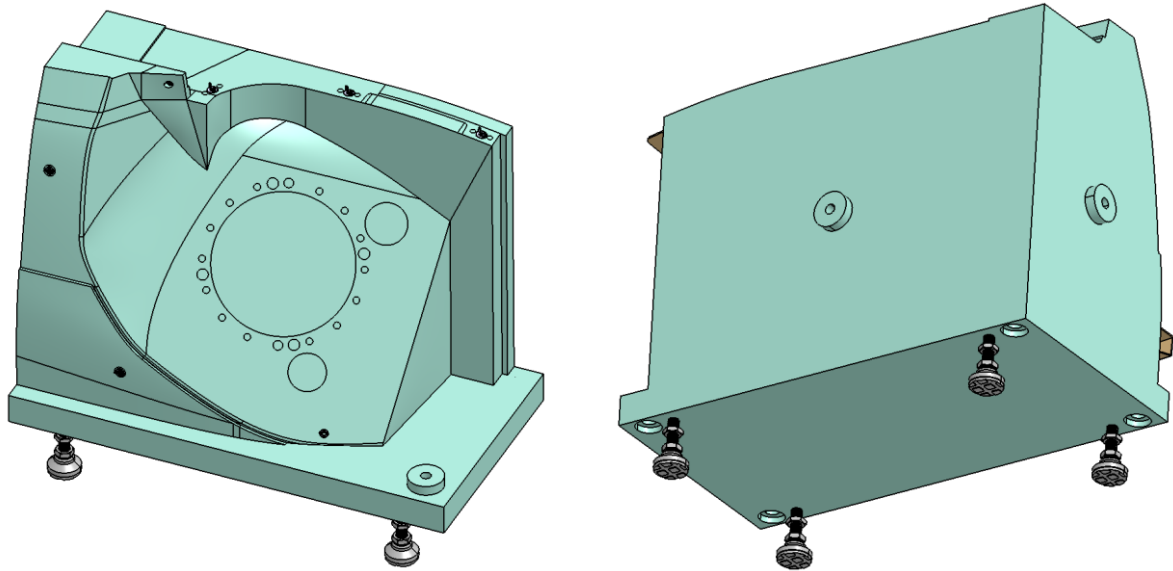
Roll Hoop Refueling Fairing Base Assembly
